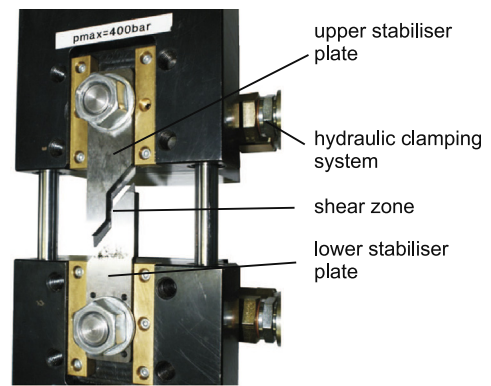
Fixture (built in tool) for the modified ASTM specimen.
